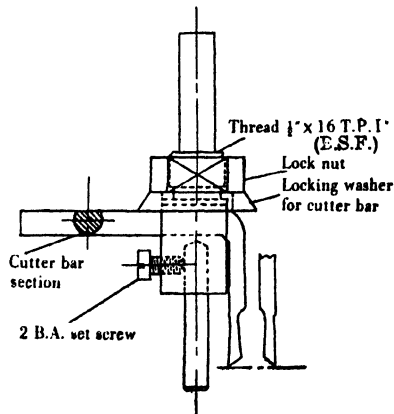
A tool for cutting circular washers or bobbin cheeks.
